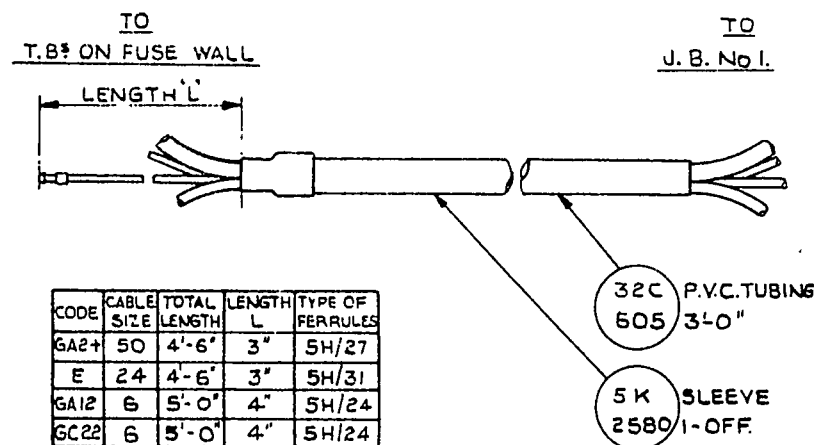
CABLE ASSEMBLY- PART No. 15N.2311A.
